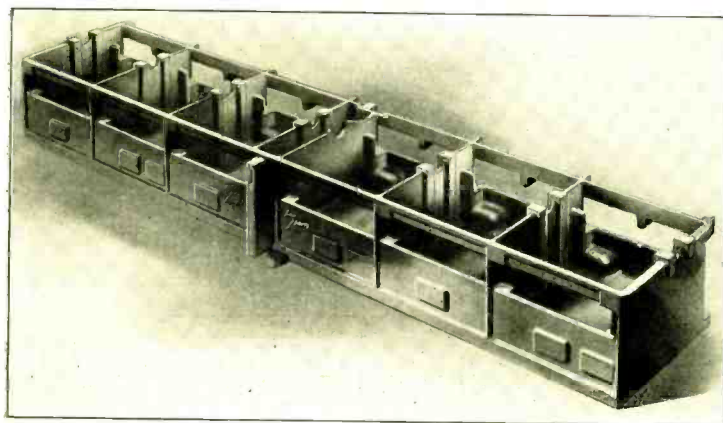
A die cast gang condenser cradle, made in one piece; a good example of modern die casting.
